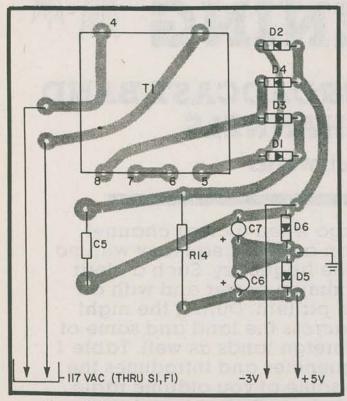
The component layout for the power supply board. Be sure to observe the proper polarity of all diodes and capacitors.
